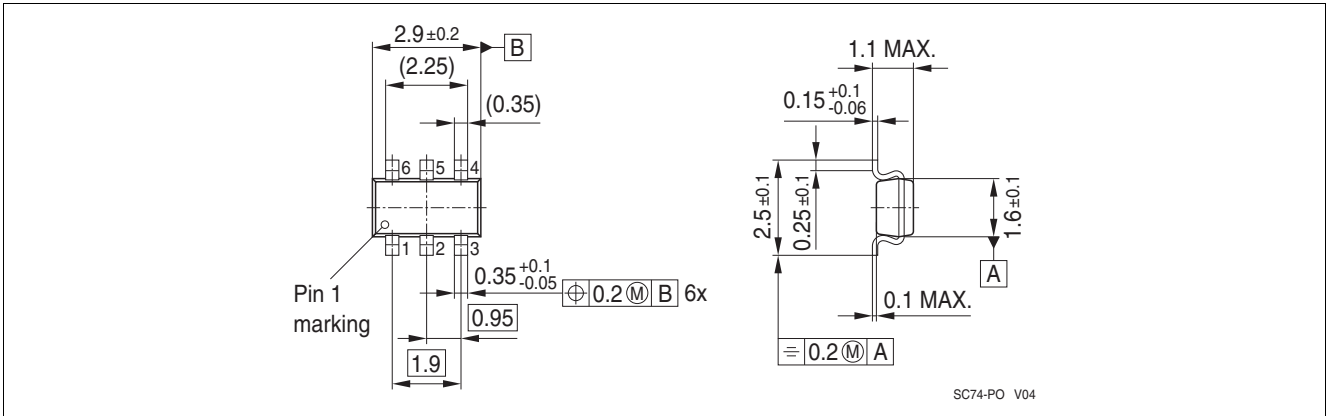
Package Outline for SC74 (dimensions in mm)
